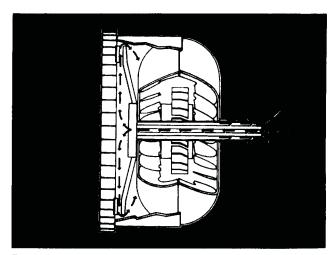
New oil passage through input shaft provides hydraulic control of lock-up piston.
